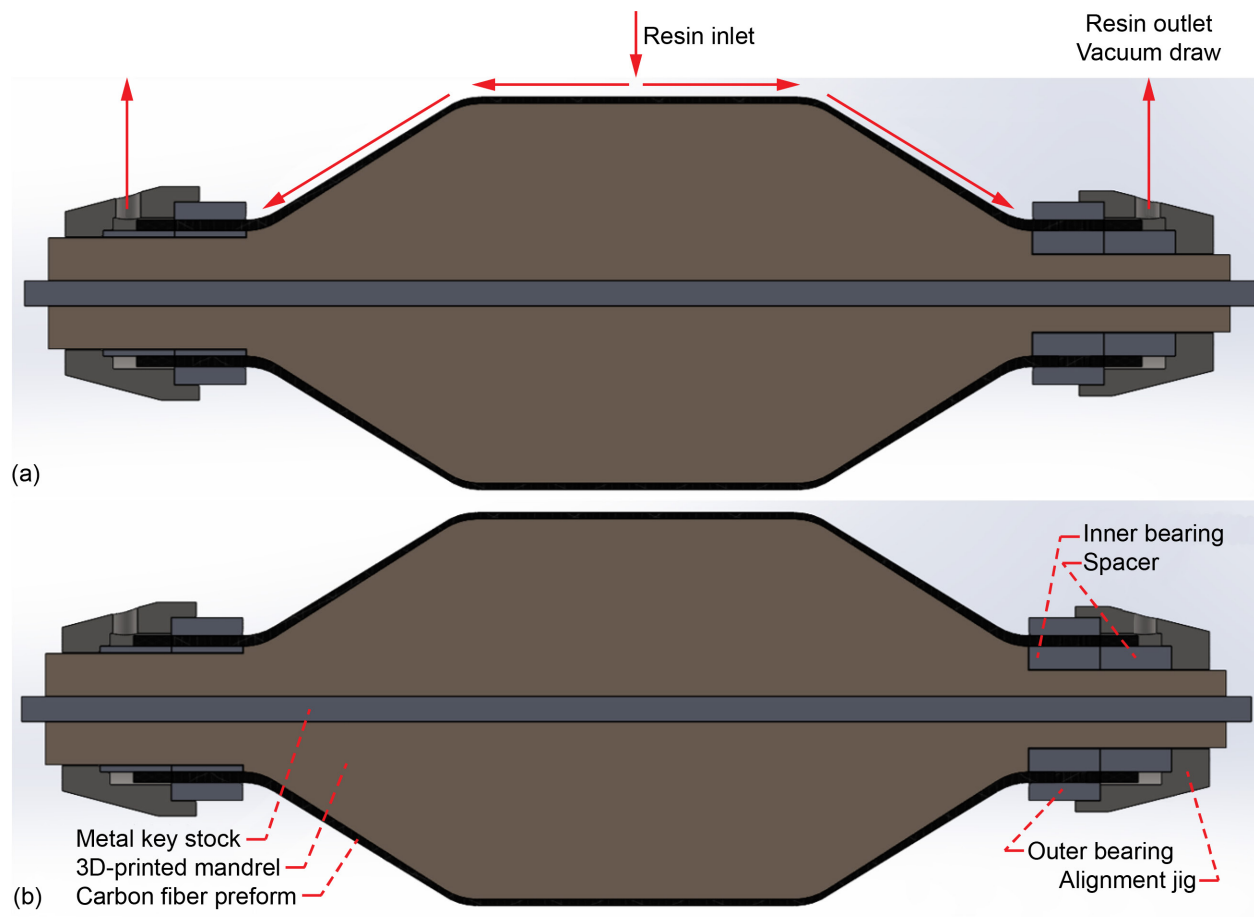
Carbon fiber preform on 3D-printed mandrel. (a) Resin infusion plan. (b) Alignment jig with bearings.
